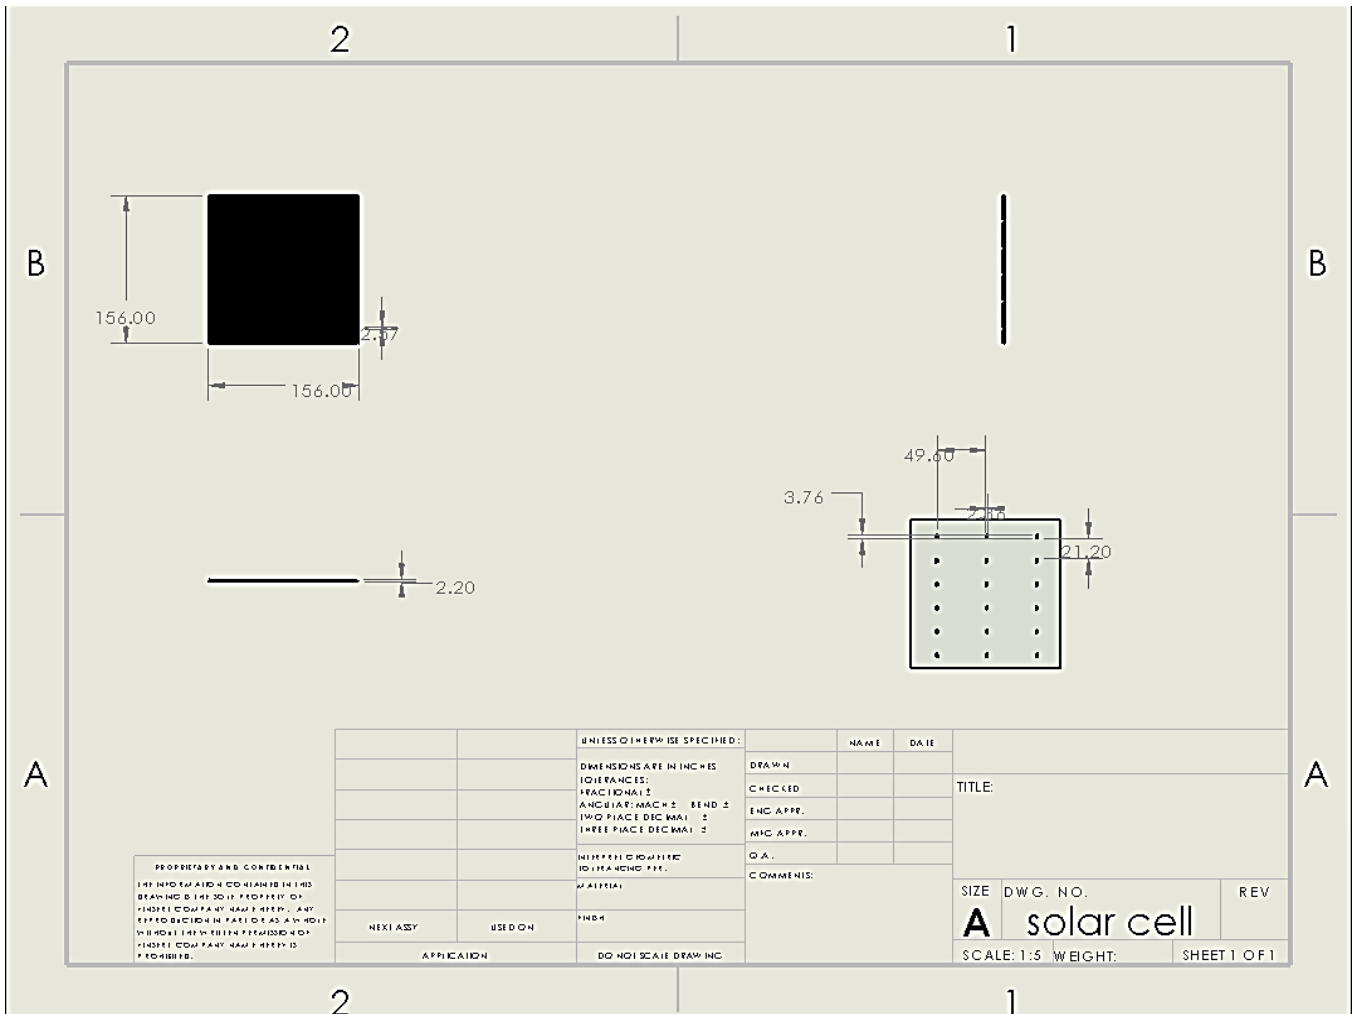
Drawing of a solar cell with dimensions (mm) (SolidWorks CAD)
